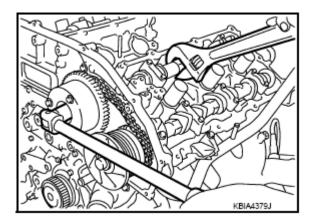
Tightening Camshaft Sprocket Mounting Bolts Using Wrench Courtesy of NISSAN NORTH AMERICA, INC.
